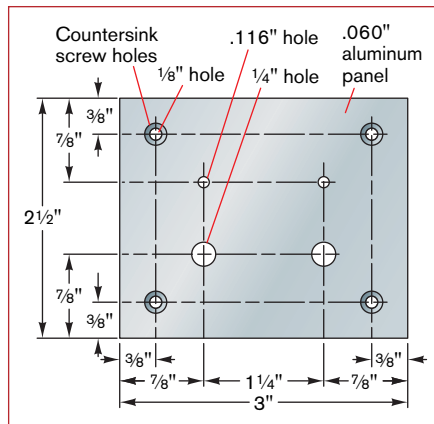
Drilling diagram. After filing and sanding the cut edges, mark the locations for drilling holes on the aluminum surface with a pencil using this illustration as a guide.
